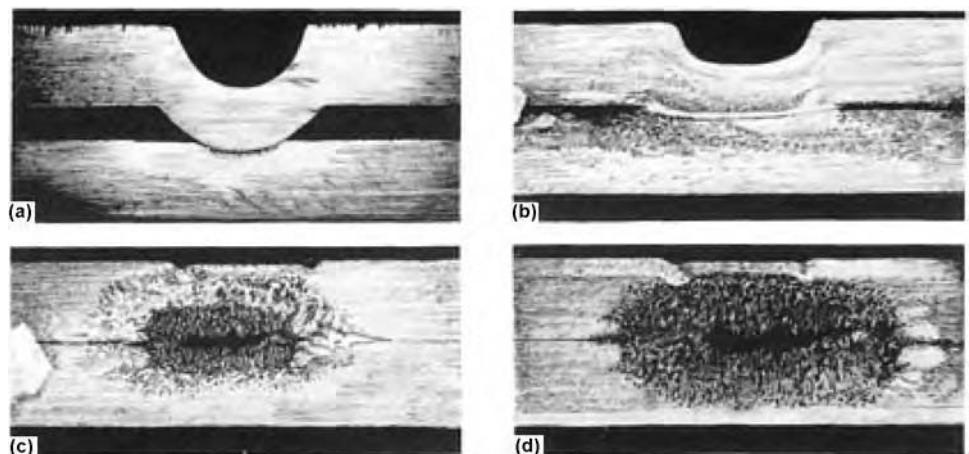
Stages of projection weld collapse and nugget formation. (a) Initial condition. (b) Solid-state weld formed after 20% of total weld time. (c) Region of incipient melting after 70% of weld time. (d) Complete weld nugget at 100% of weld time
